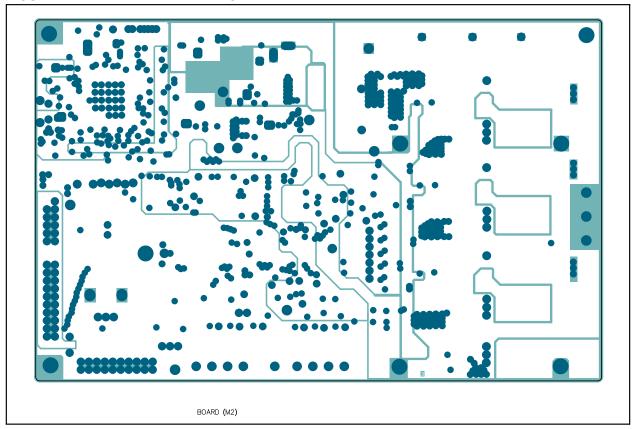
BOTTOM LAYER: BOTTOM SILK AND BOTTOM COPPER
